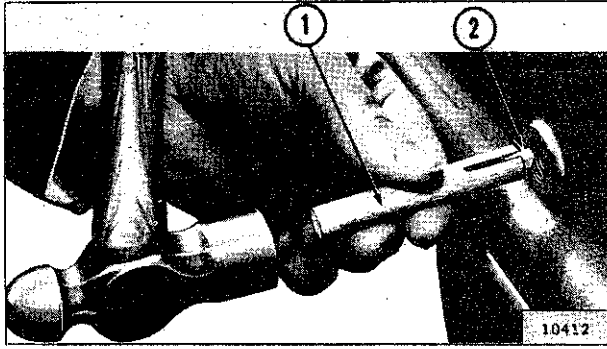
REMOVING OIL PRESSURE RELIEF VALVE WITH WEDGE
